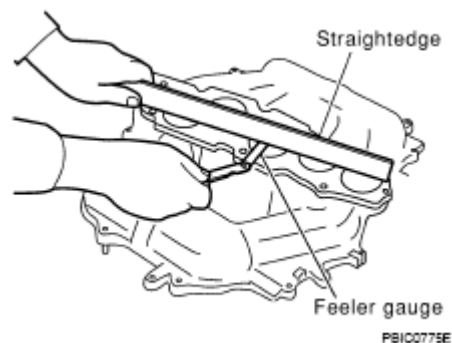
Checking Surface Distortion Intake Manifold Collector (Upper And Lower) Mating Surfaces
